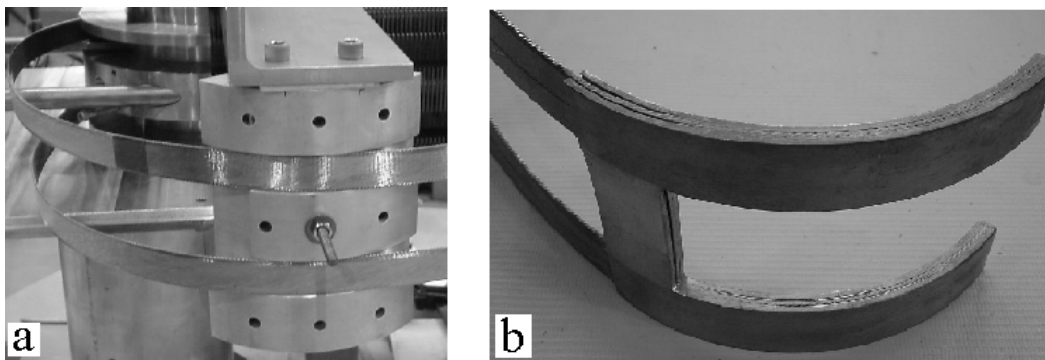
Cable splice fixture (a) and cable splice (b) ready for installation.
